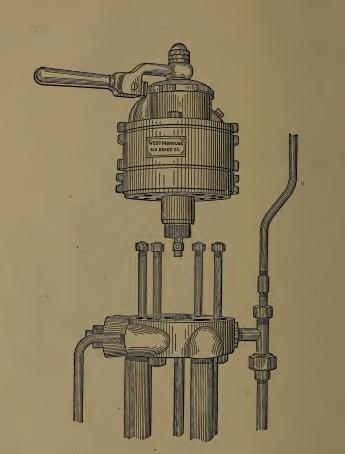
H-6 Automatic Brake Valve Removed from its Pipe Bracket.
